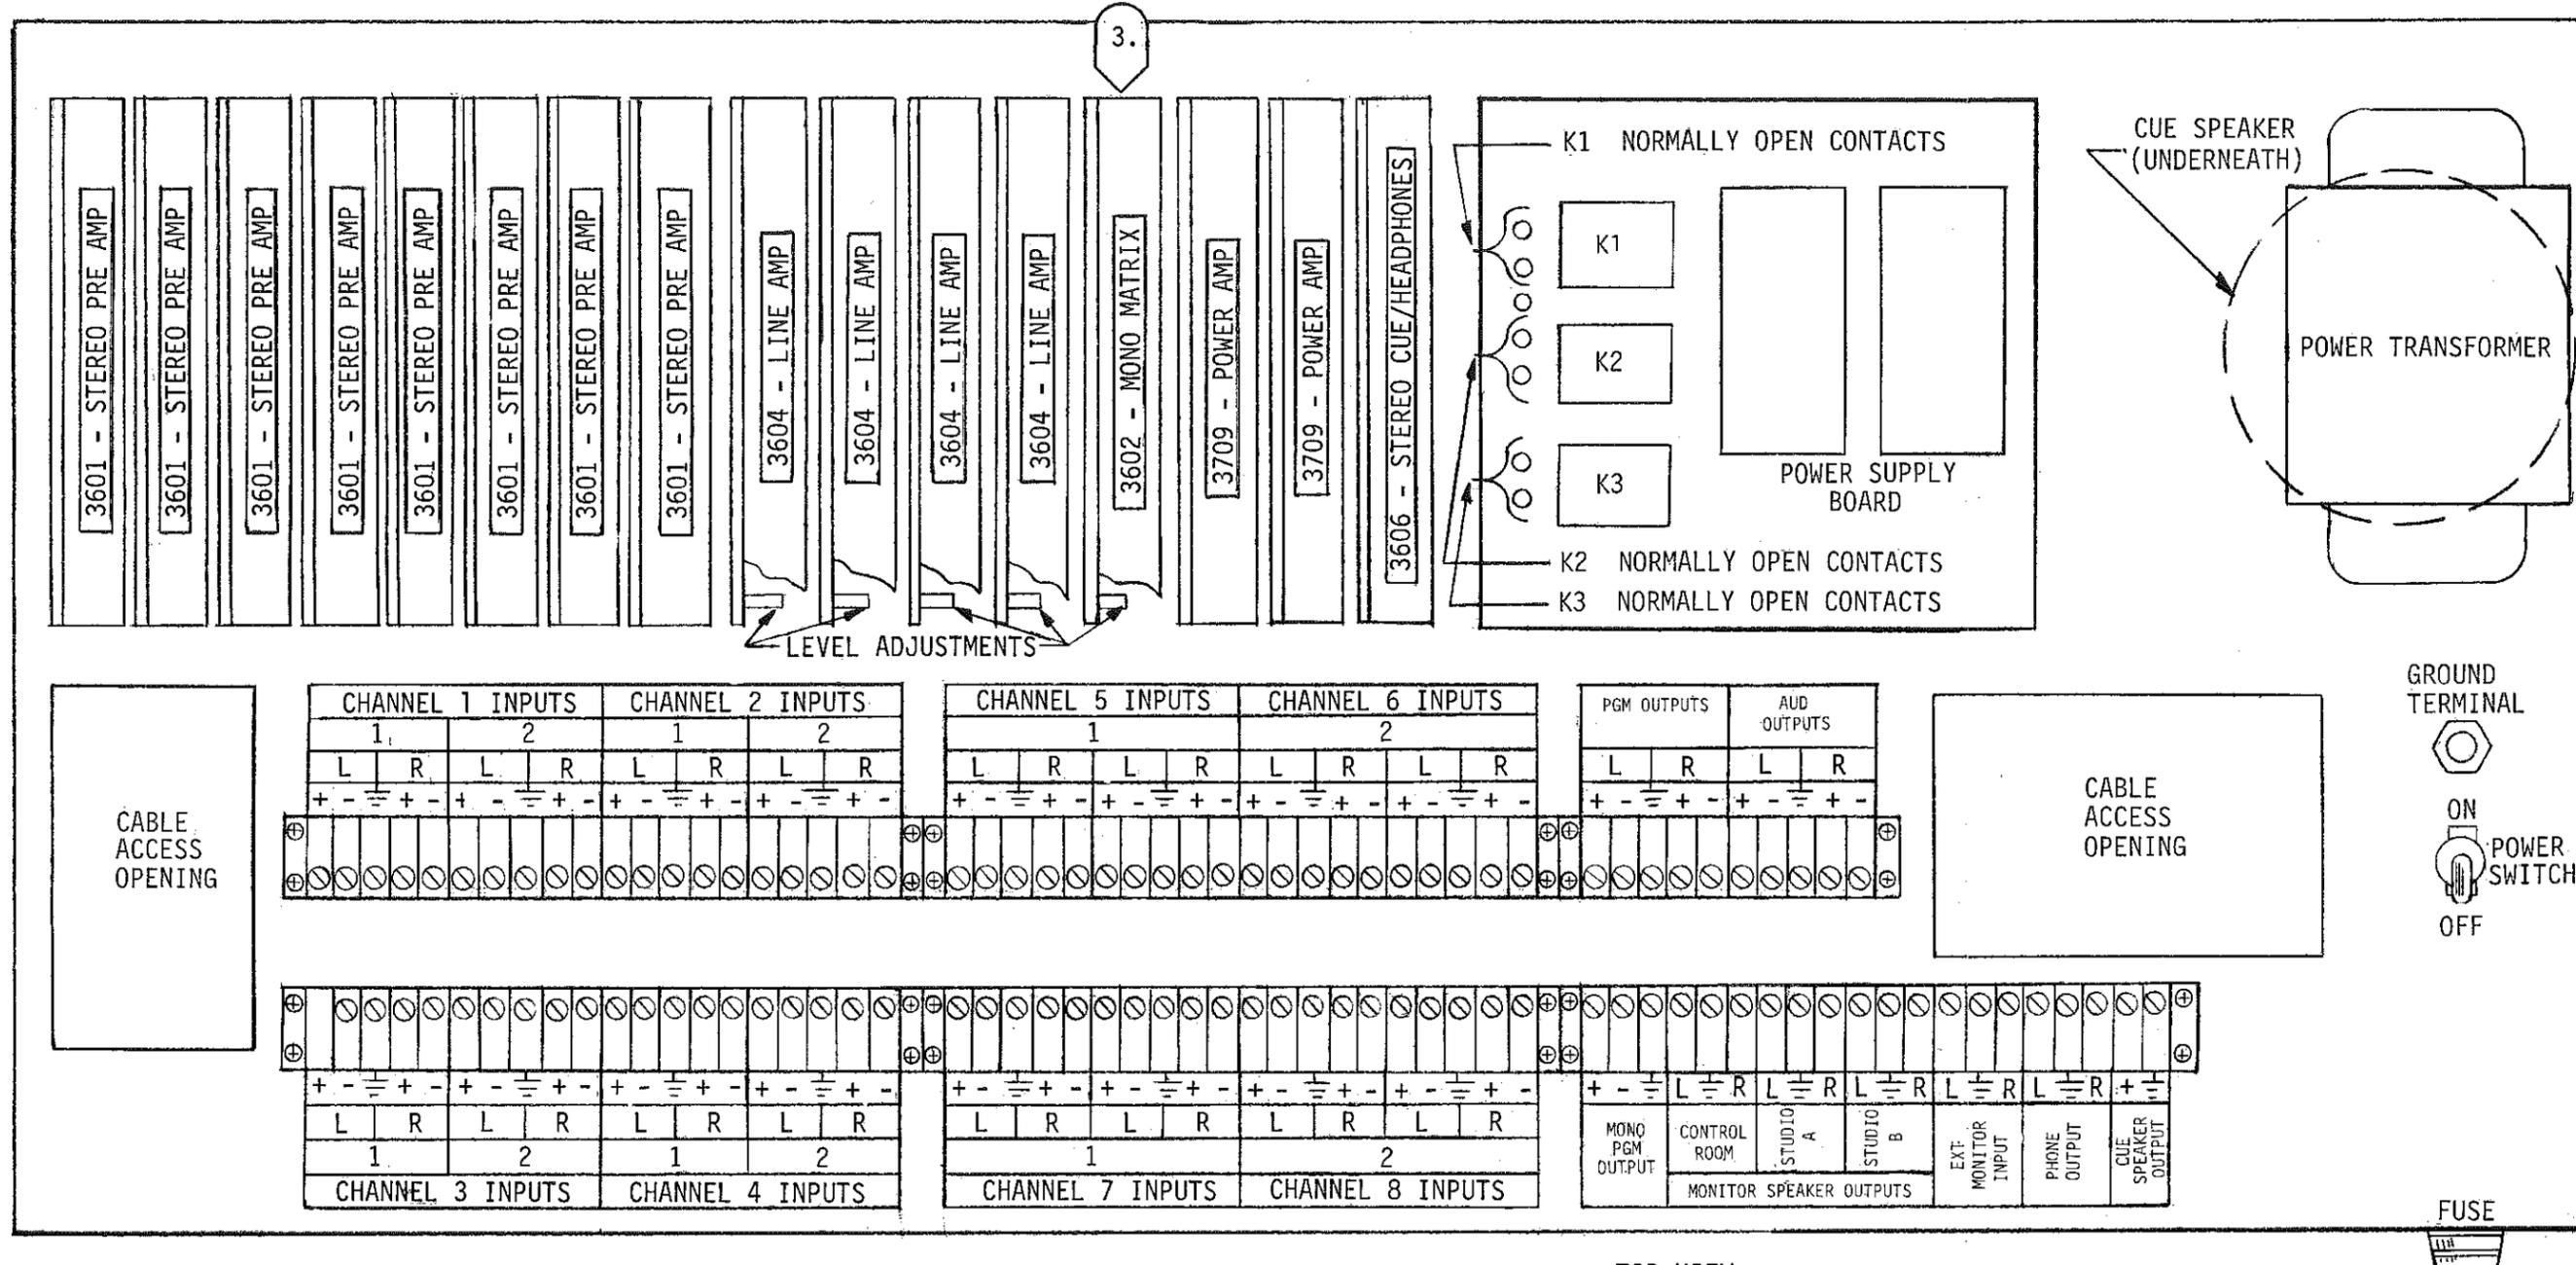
8M250 CONSOLE CHASSIS
